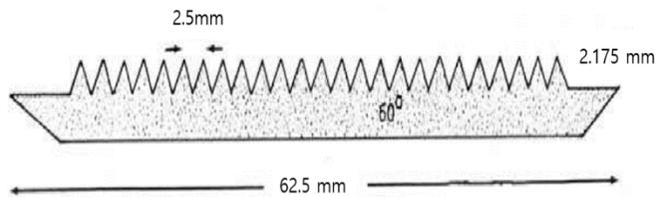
7 Shear plate design (Lutenegger & Hallberg, 1981)
